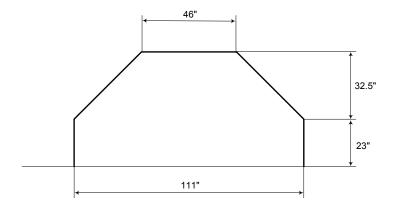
Partial Cross-Section of Outer Surface of TEV Shielding
